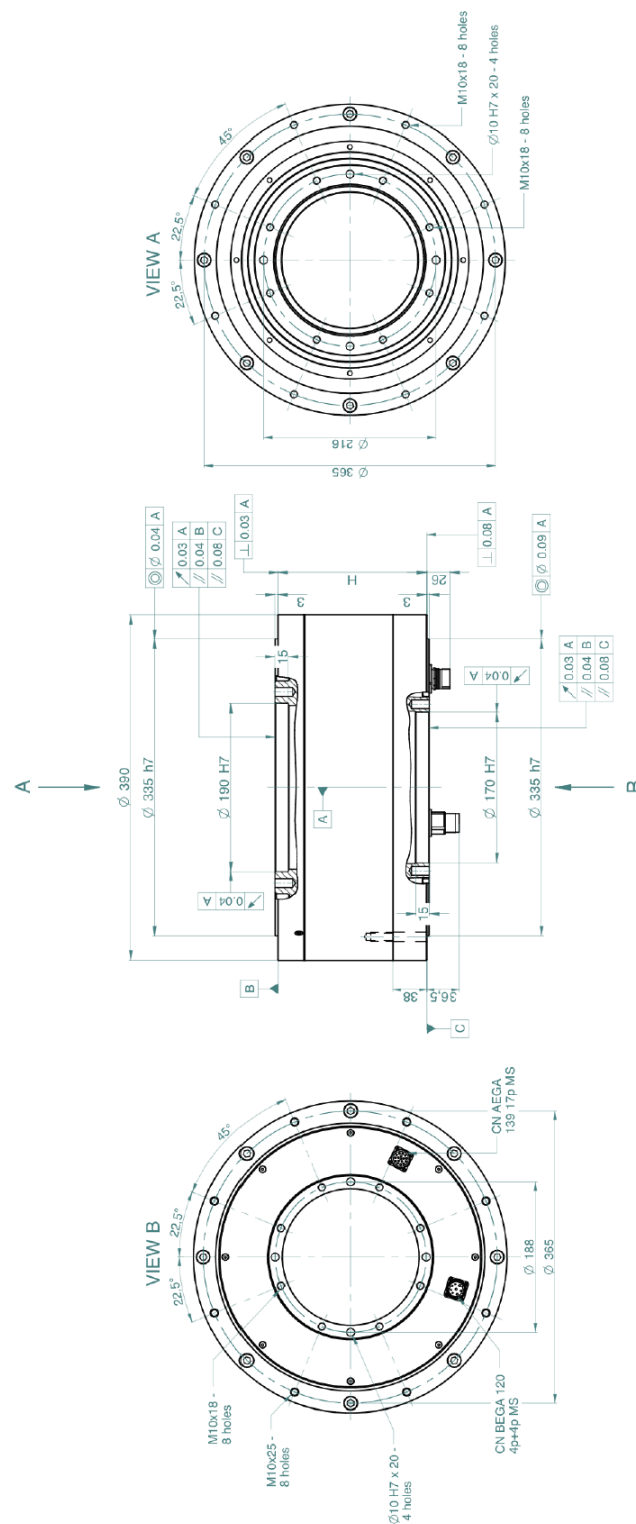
Motor Power Company SKA RT 335.90 technical drawing.
